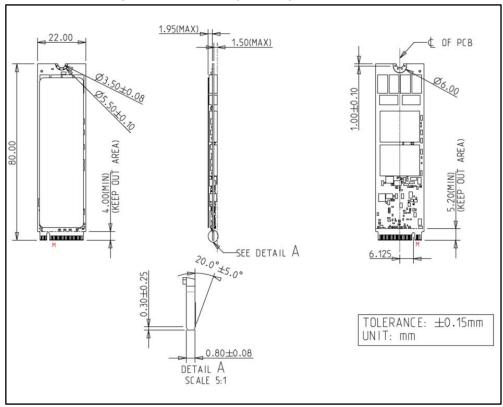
Innodisk M.2 (P80) 4TE2 mechanical drawing
